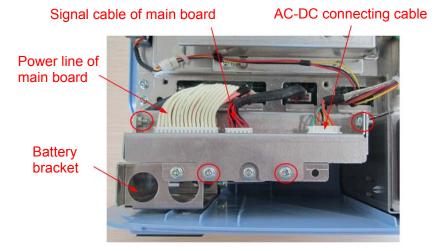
Disassembly of DC-DC board (not support the battery) (2)
